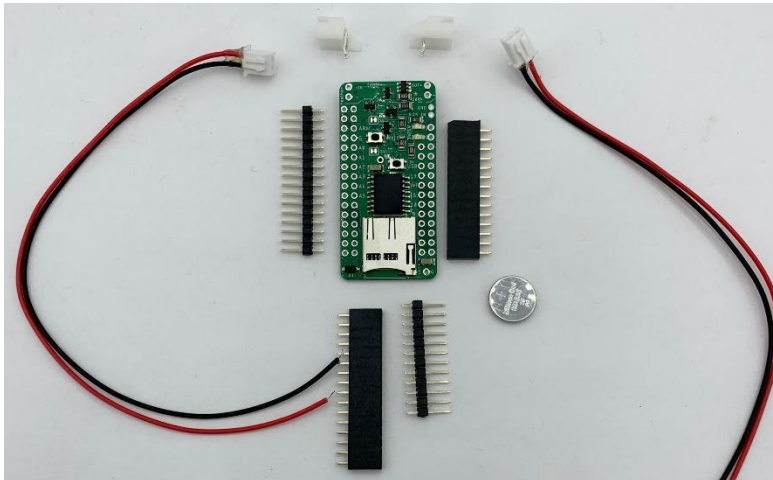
Top of assembled Hypnos PCB with components to be added. Note 2 pin JST on left has a clipped fin and microSD card is not shown.
